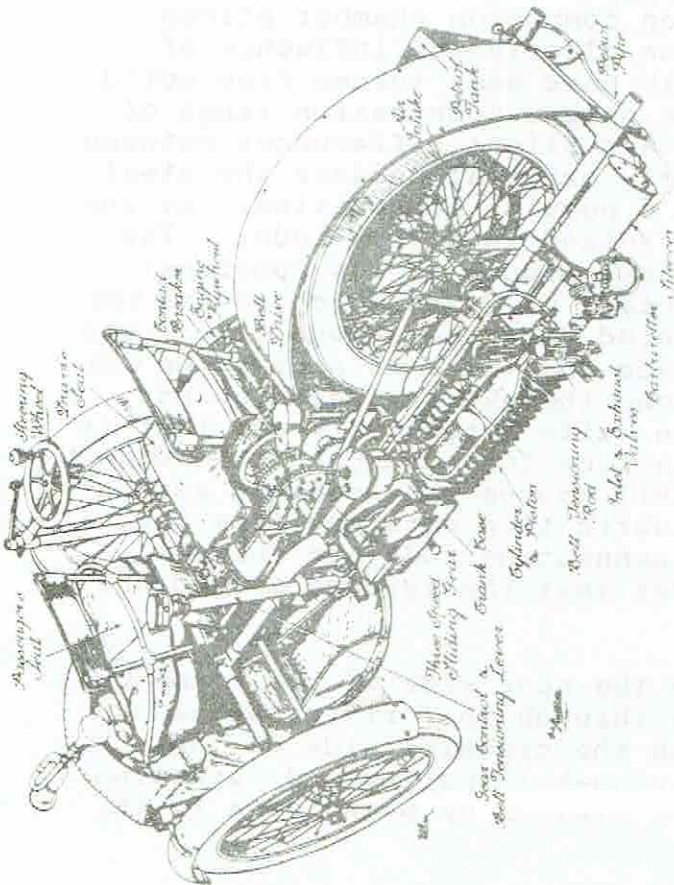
2 h.p. Leon Bollée motor of 1896
